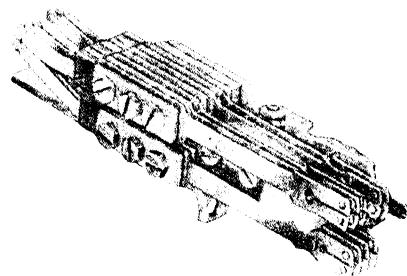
TYPICAL MECHANICALLY OPERATED SPRING SET
